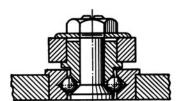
Arm joint of a pantograph machine, with center stud clamped without end play, stud head and bushing end forming the ball race.
